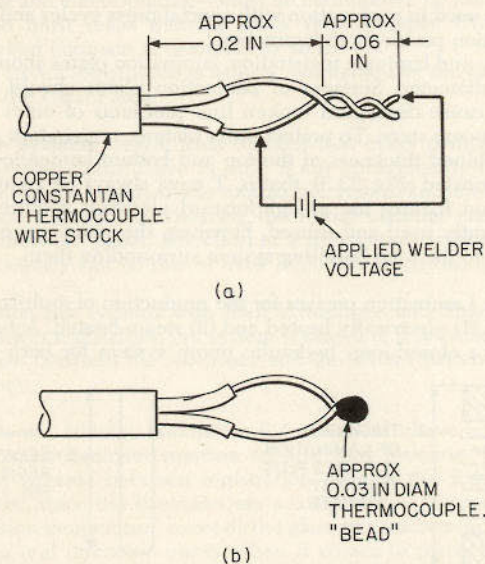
Thermocouple. (a) Before welding; (b) after welding.
